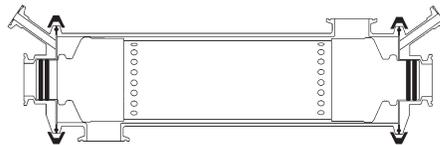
Cutaway view of an STM cartridge element in an STM housing
